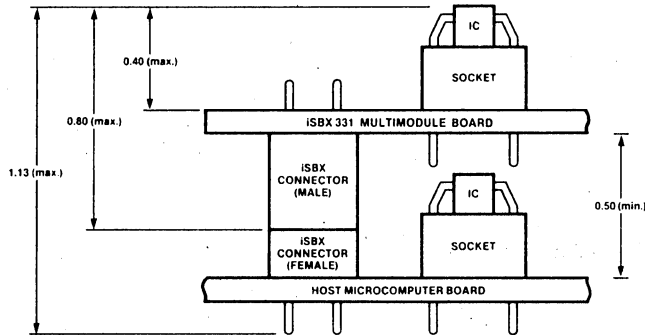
iSBX 331 MULTIMODULE Board Mounting Clearances (inches)
